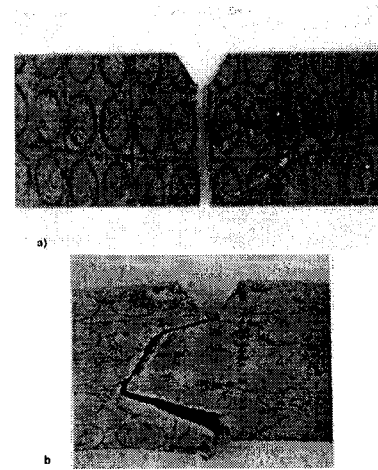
Fractured Charpy specimens taken from the flange of a deep draw cup (Charpentier 1981, 176) and fractured in drawing direction and perpendicular to drawing direction. Energy absorbed was lower in sample a).
